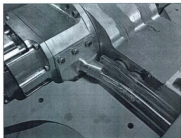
Wiring hatch fully installed with cables installed in PVC hose.
